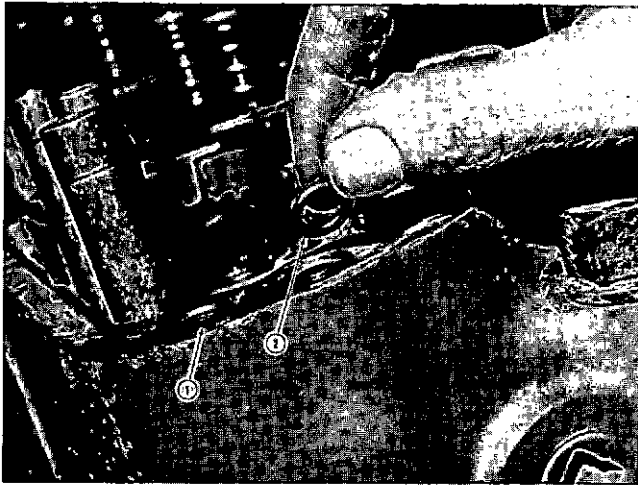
, V414162. Oil restrictor plug and "O" ring
